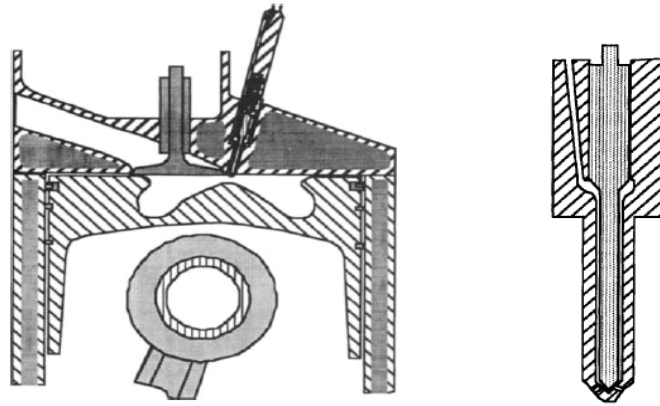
HSDI and hole-type nozzle to inject fuel into the combustion chamber.[3]
